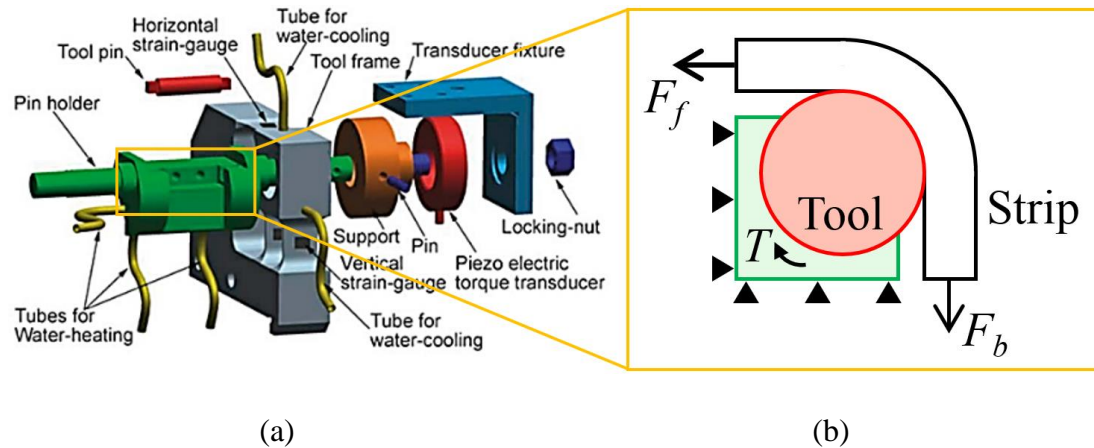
a) Exploded view of BUT equipment [35] and b) Schematic of the BUT test.
